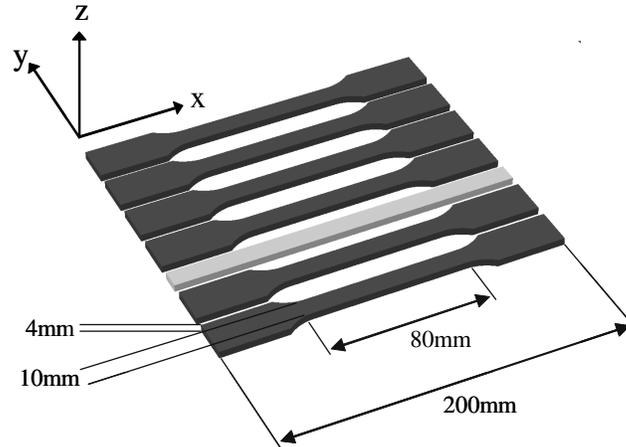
ISO 527-2:1996 type 1A tensile specimen parts and ‘sample’ part
